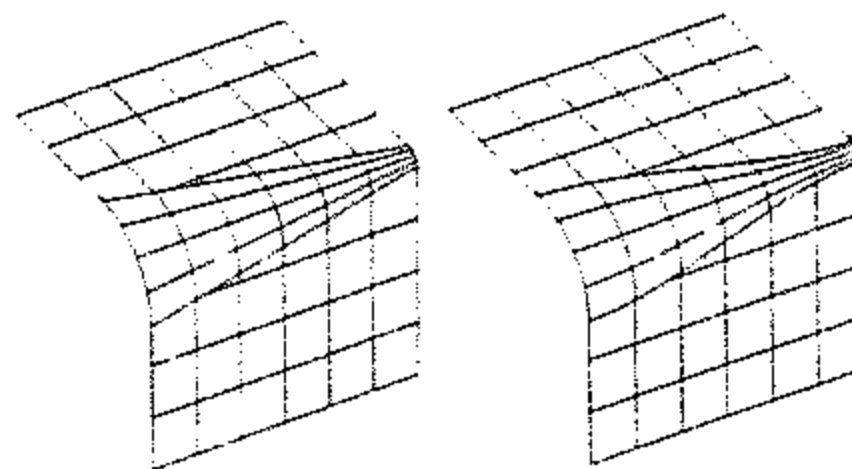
Linear variable fillet (left) and cubical variable fillet (right)
